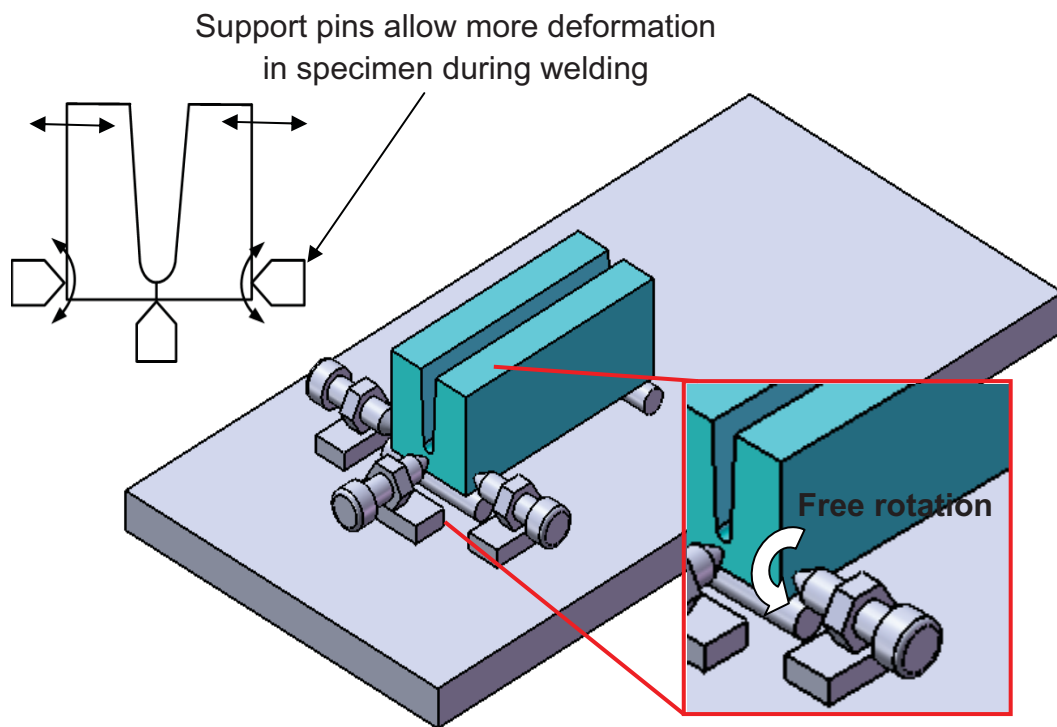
Illustration of a specimen placed on a pin support fixture.
